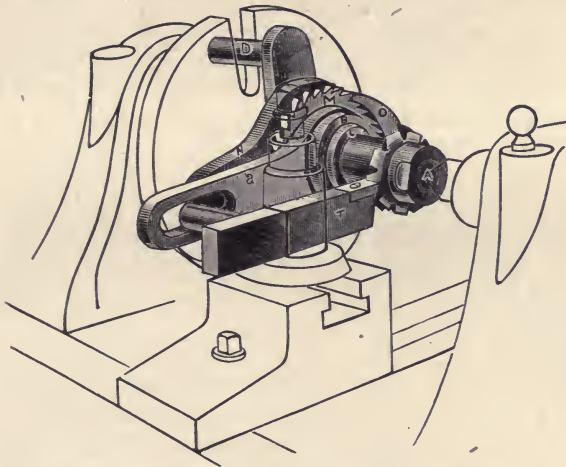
BACKING OFF MILLING-CUTTERS. (BALZER.)
